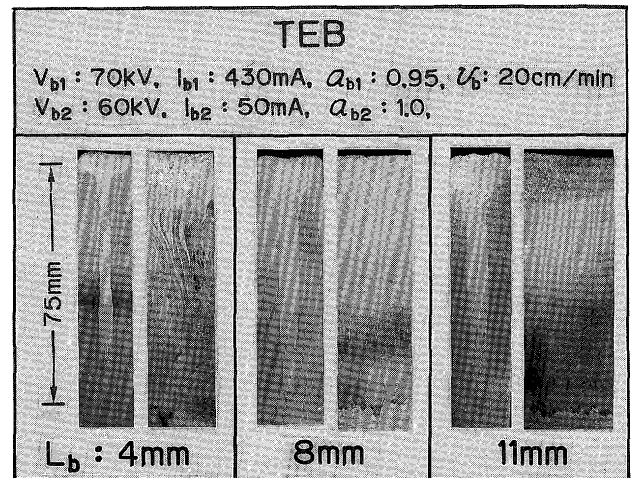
Longitudinal and cross sections of TEB welding bead at various Tandem Gaps
